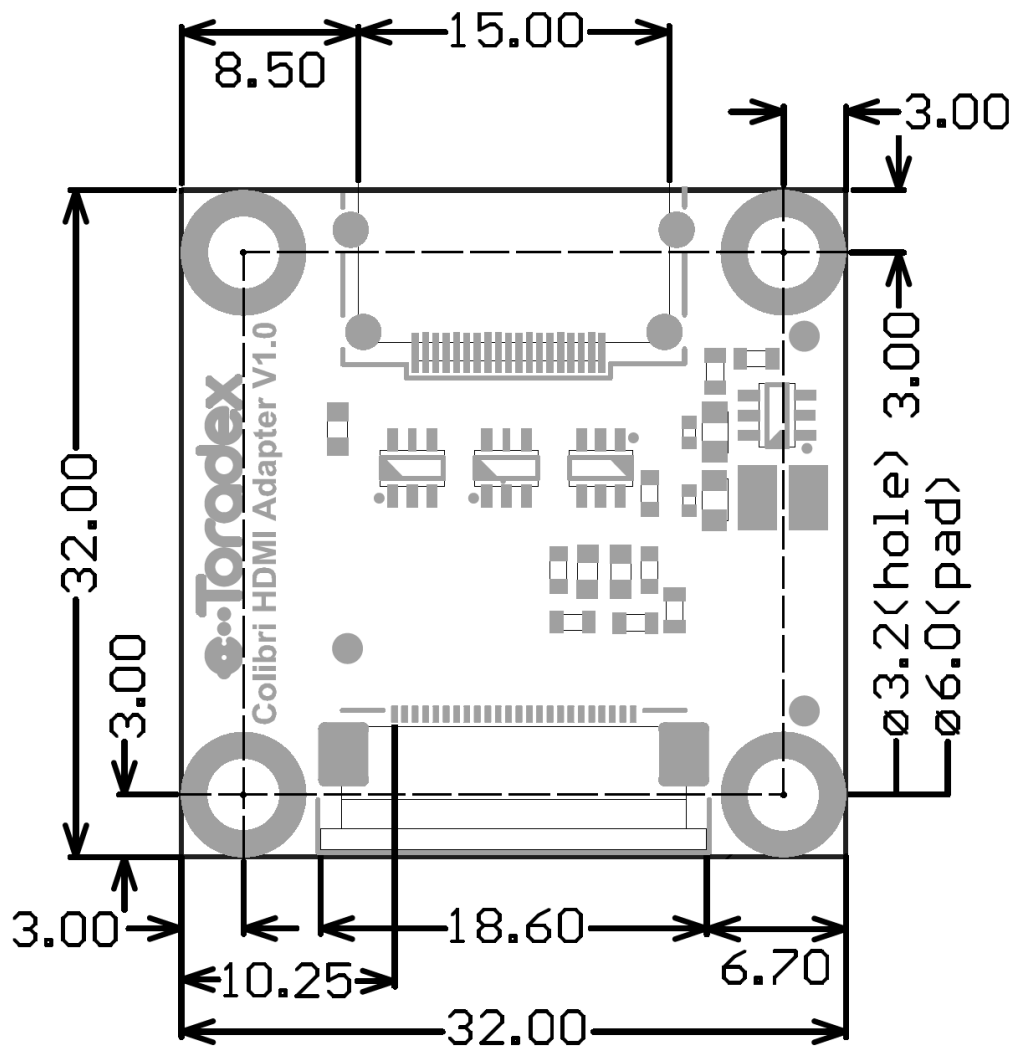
Colibri HDMI Adapter Mechanical Drawing – Top Side,
